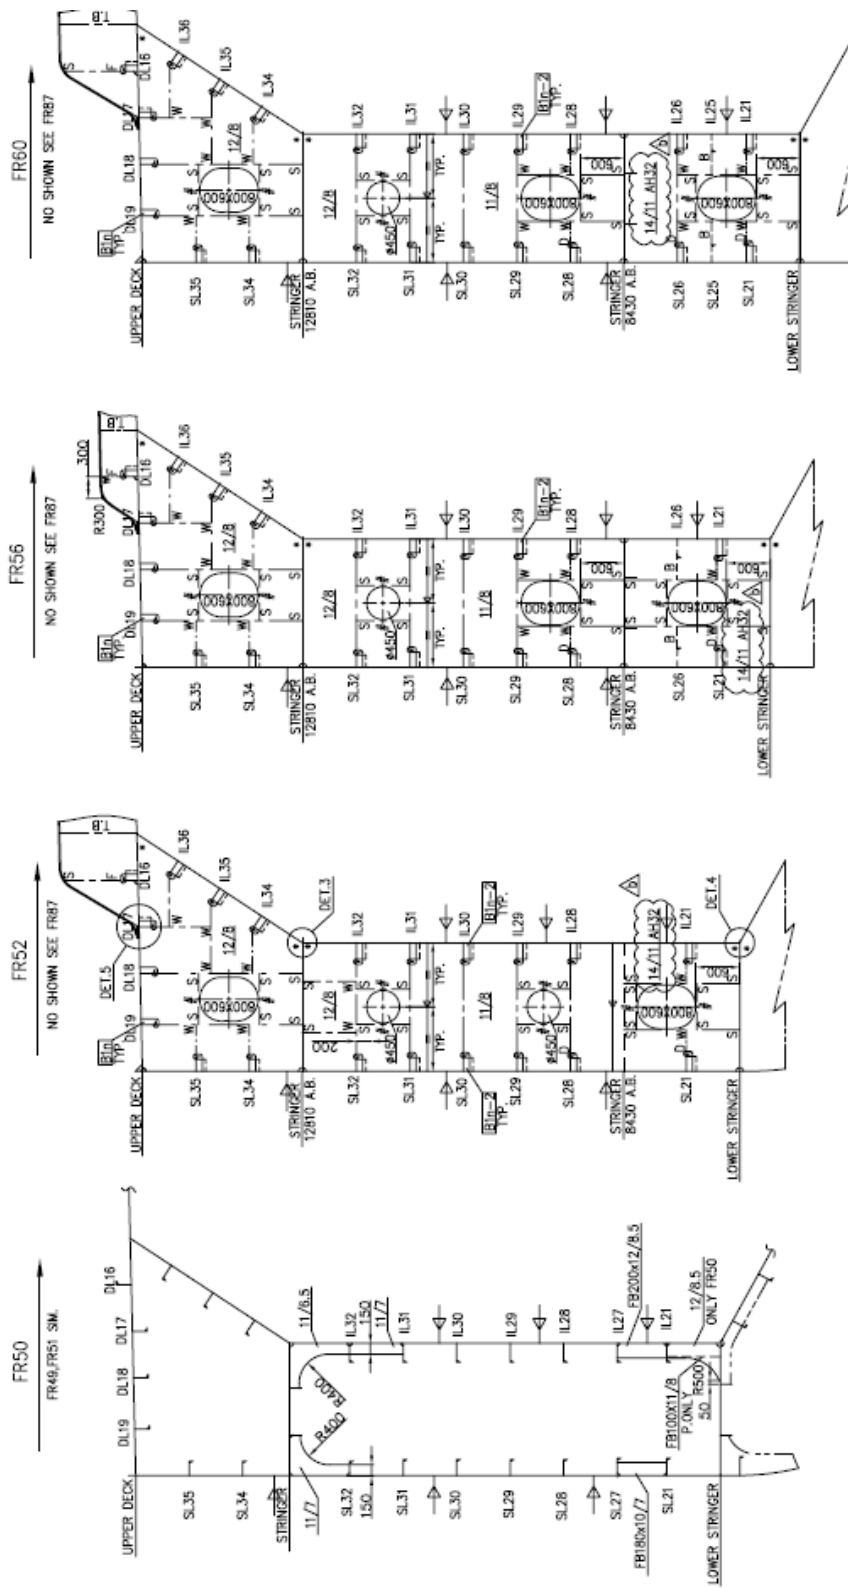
(b) – Double side construction in several frame sections, transverse view
